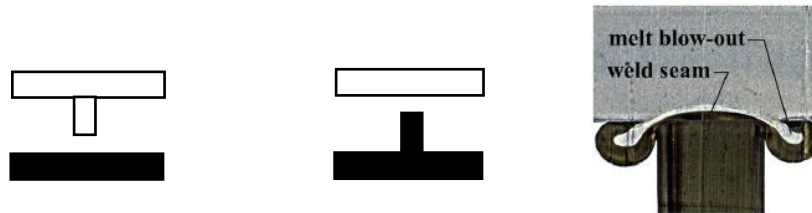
T-Joint samples. a) sample with the rib in the upper part; b) sample with the rib in the bottom part; c) welding junction of b [67]
